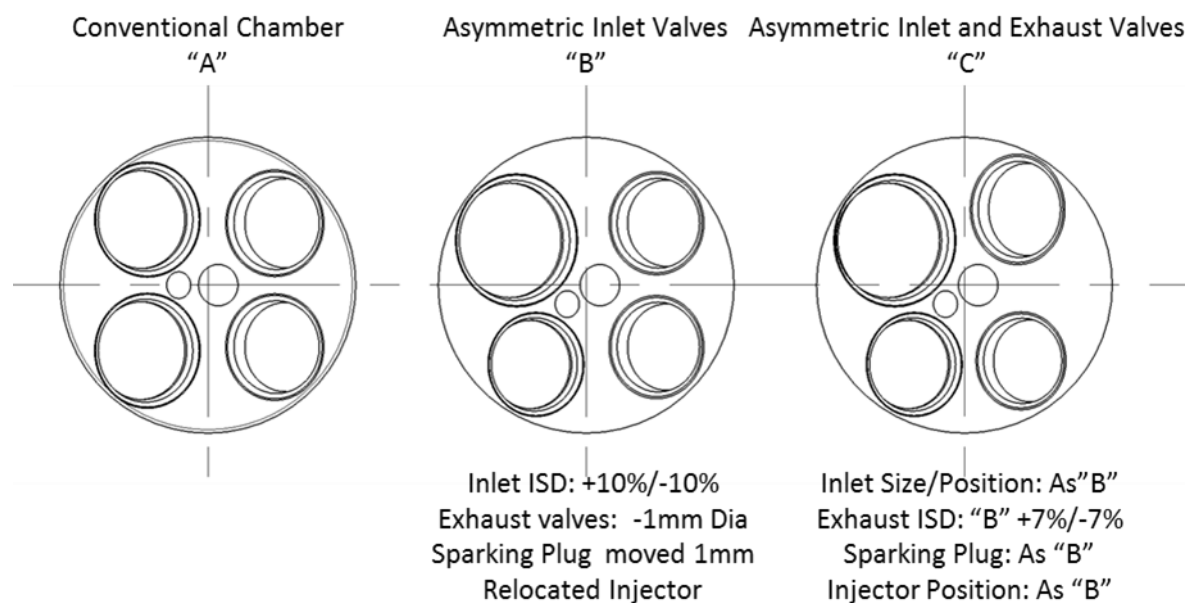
Increasing Combustion Chamber Asymmetry - a Conventional Chamber, Asymmetric Inlet valves and Asymmetric Inlet and Exhaust valves
